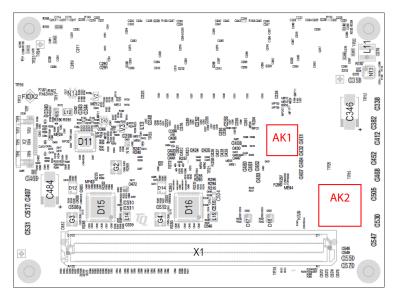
TQMxCU1-HPCM Component Placement Bottom
